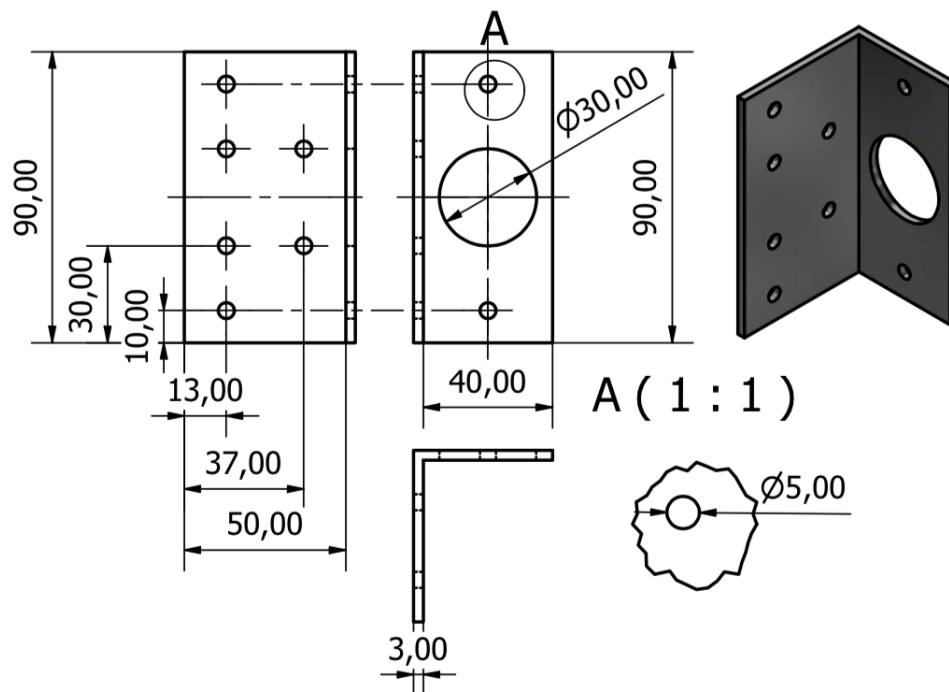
Dimensions diagram in millimeters for the L-shaped holder of the Rogowski coils system.
